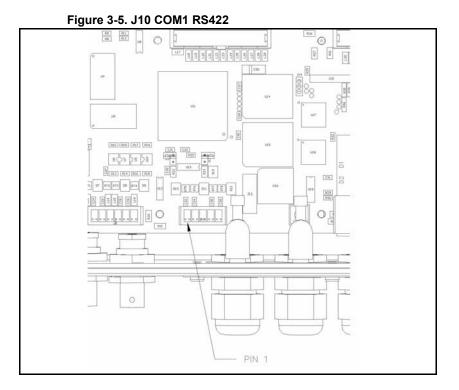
shows the LRP2000 COM1 RS422 terminal block, J10, and a detail view illustrating the arrangement of the terminals
